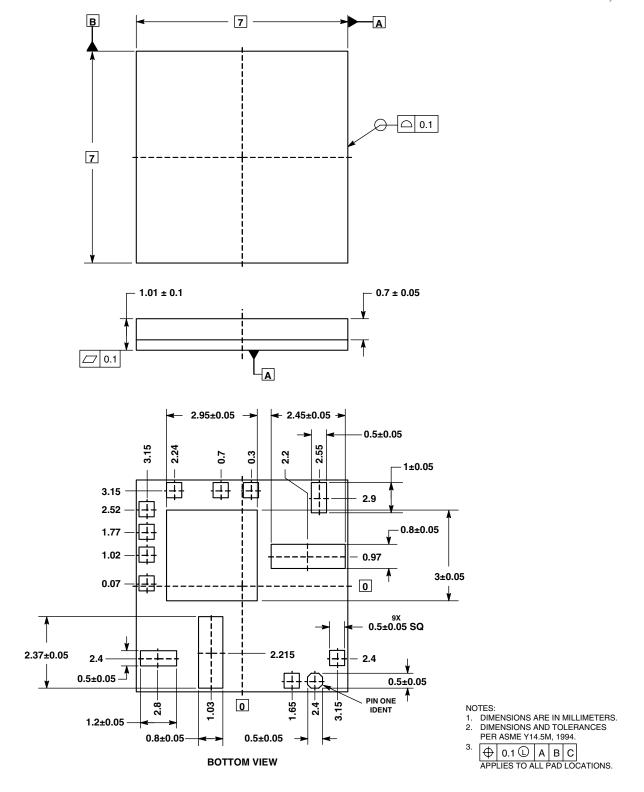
Outline Dimensions for 7x7 mm Module (Case 1383-02, Issue A)
